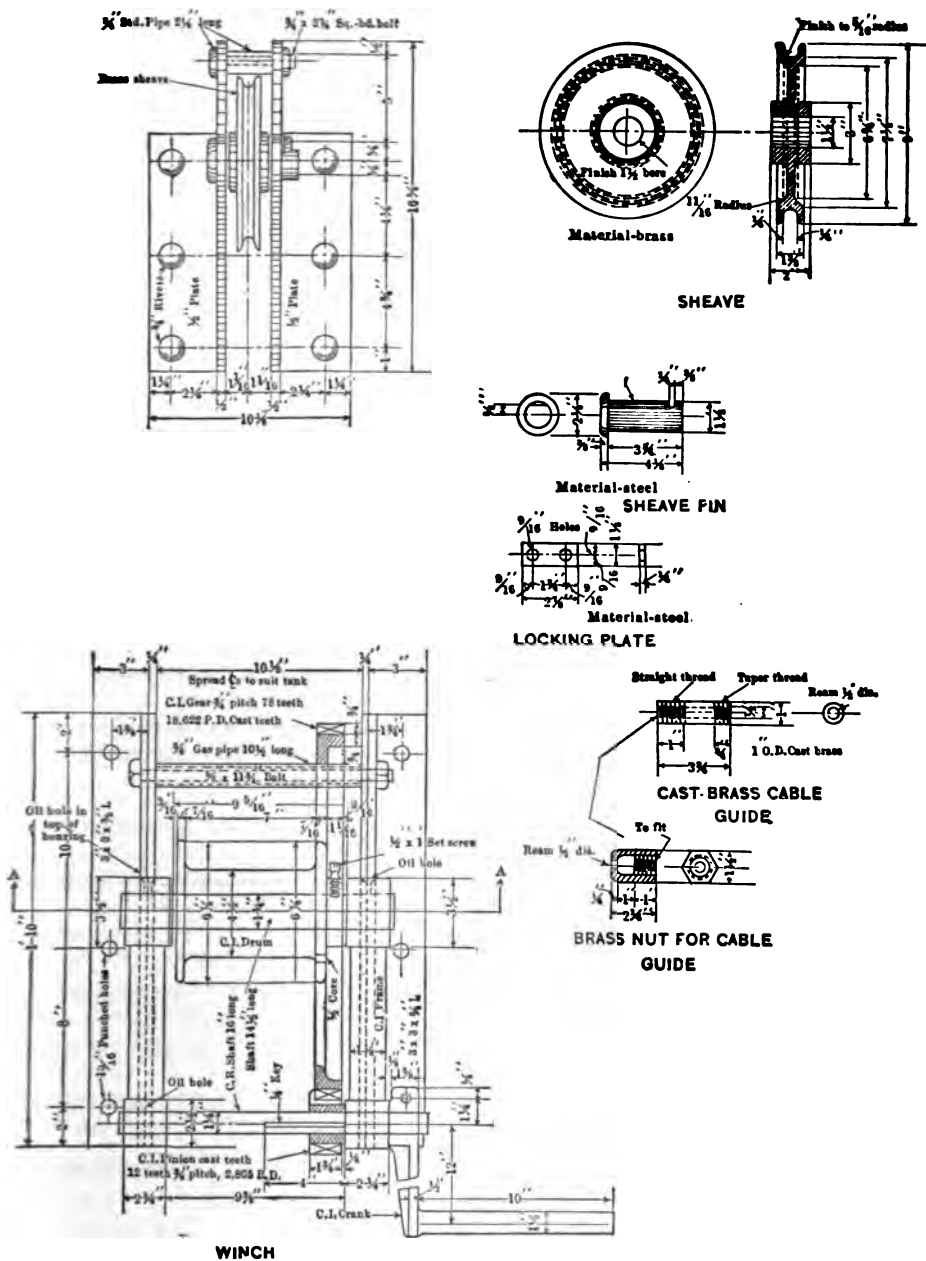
Geared winch and cable guide for swing pipe cable.
